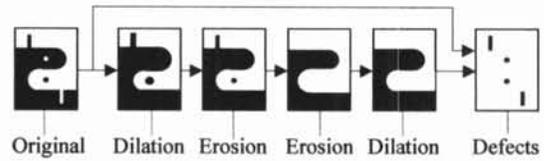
Inspection of PCBs and its principle (1972)
